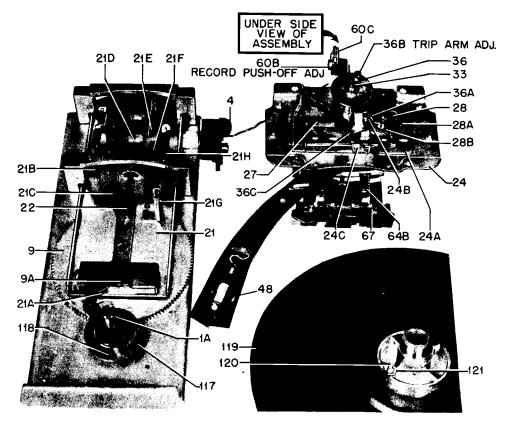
VIEW OF RECORD CHANGER WITH BASE & MOTOR ASSEMBLY REMOVED
